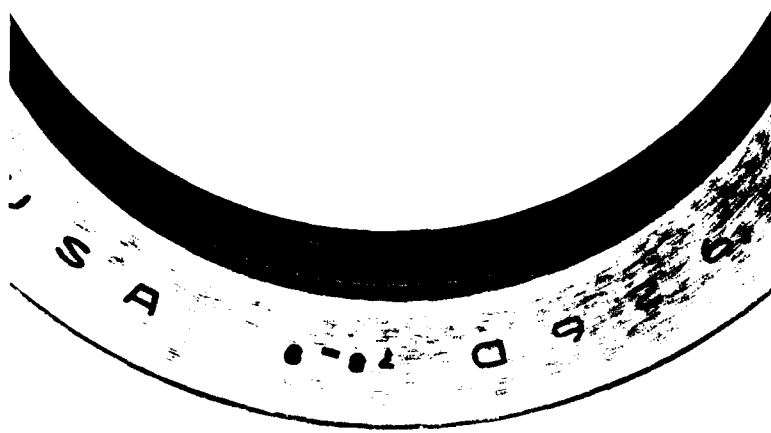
Cup, Rollers, and Cage Used at Drive End of Shaft 78-4 in Test Setup No. 5 (Sheet 2 of 2).
